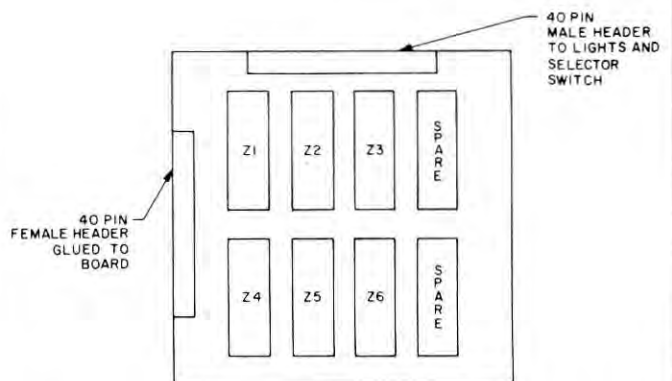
A 40-pin, right angle, dual-row strip line converter was soldered to the expansion connection on the LNW. This board plugged in and is supported on the right by a 1/2-inch rubber grommet.
